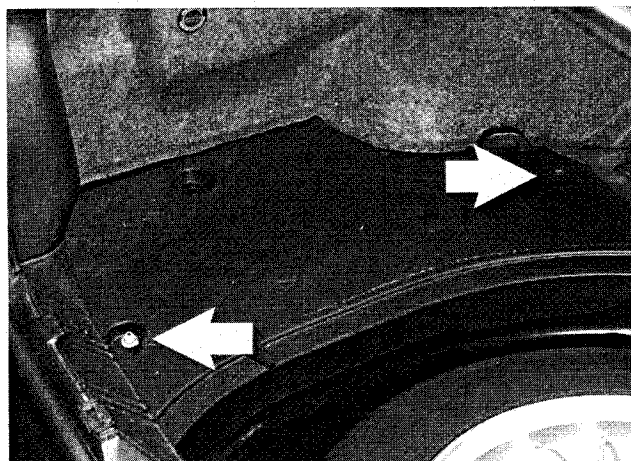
Luggage compartment floor panel fasteners (arrows). (Left side shown. Right side is similar)
